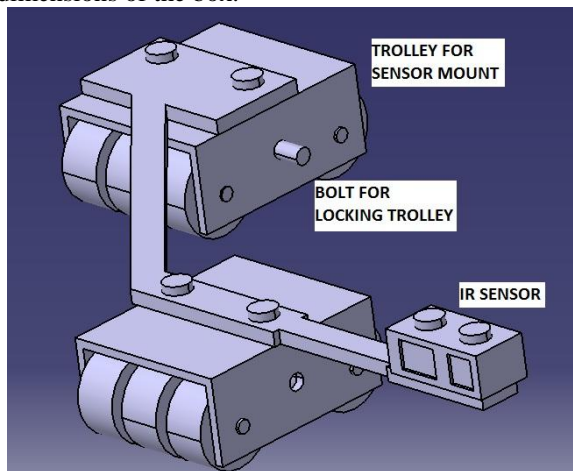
Trolley on which sensor is mounted. Holes for locking trolley in guide-rails.
